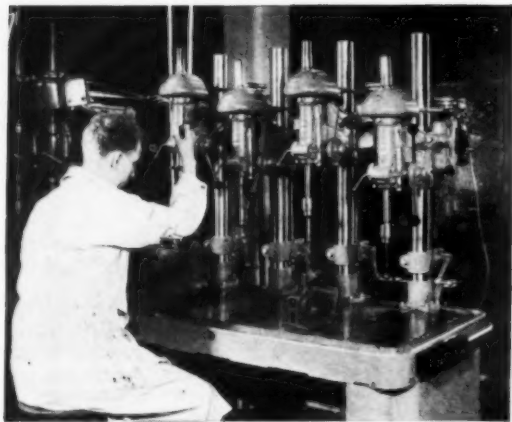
A multiple spindle unit used in jig work where a number of holes of different sizes are involved. The parts shown are pumping units for lubricating systems of grinding machines.
